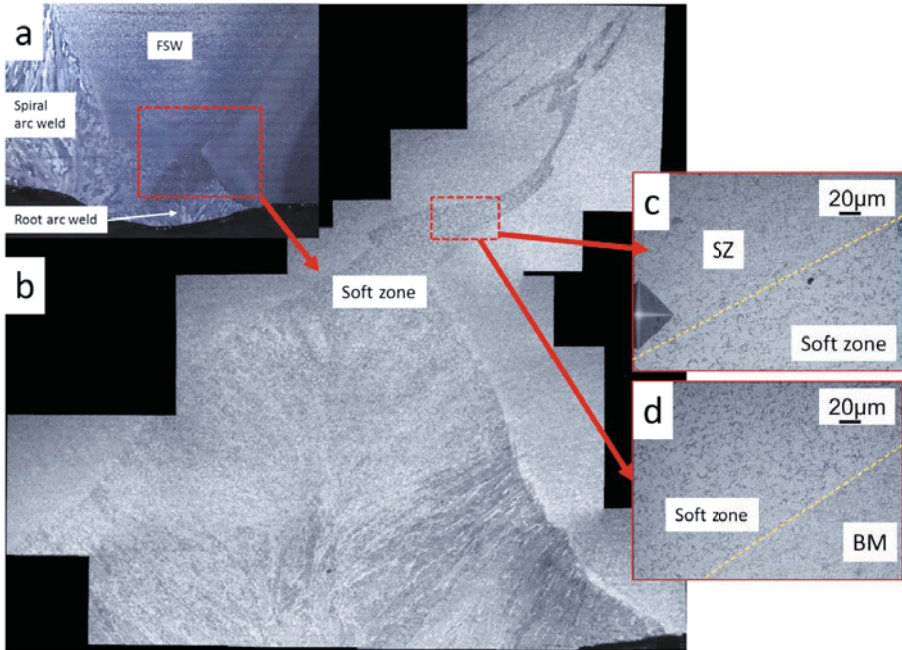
Macrograph and magnified images (red dot boxes) at the intersection between the friction stir weld and root arc weld. (a) Macrograph image showing three different regions (FSW, spiral arc weld, and root arc weld). (b) Low magnification optical image at the interface between the friction stir weld and root arc weld. (c) Magnified optical image between the SZ and soft zone (d) Magnified optical image between the soft zone and BM.
